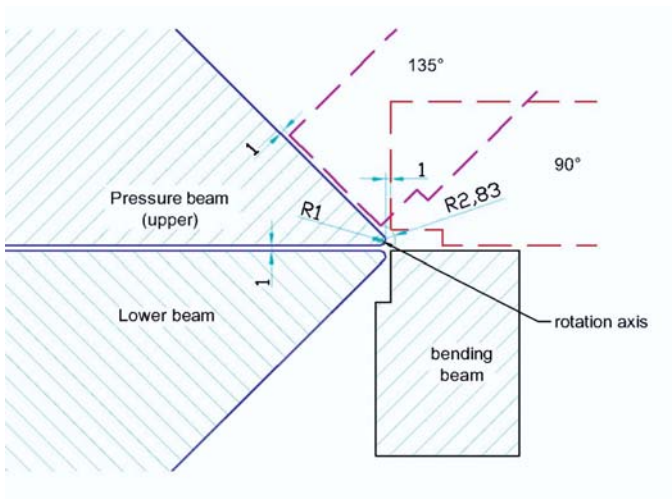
The scheme of sheet bending based on the rounding radius of the edge of the pressure beam
